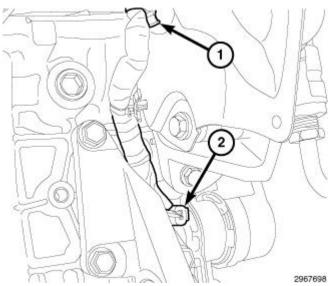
Power Steering Pump Bracket Bolts & Retainers Courtesy of CHRYSLER GROUP, LLC
